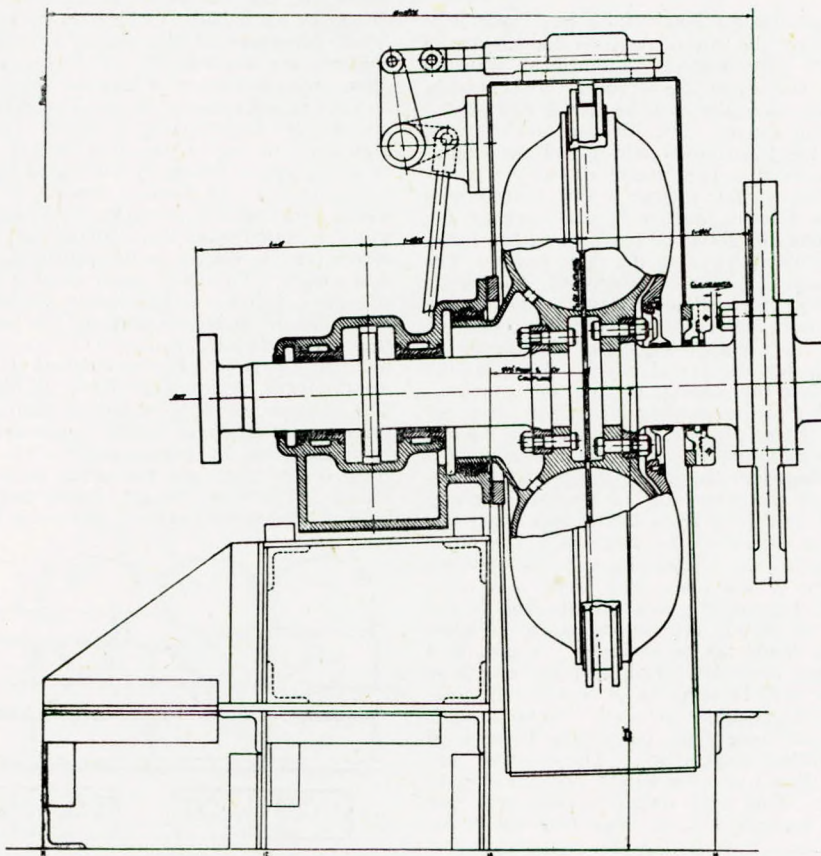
Tunnel shaft bearing, coupling and thrust bearing
